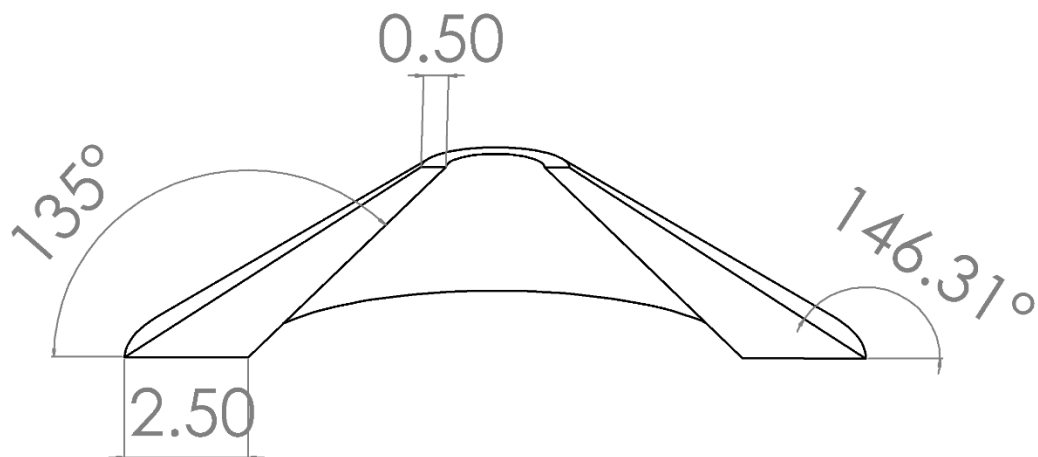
Cross section of a sample cone. All linear dimensions are in millimeters.
